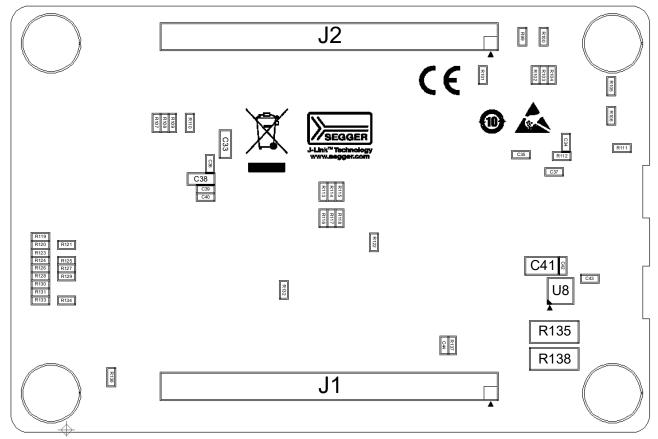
Main Board Component Placement (Bottom-Side View)
